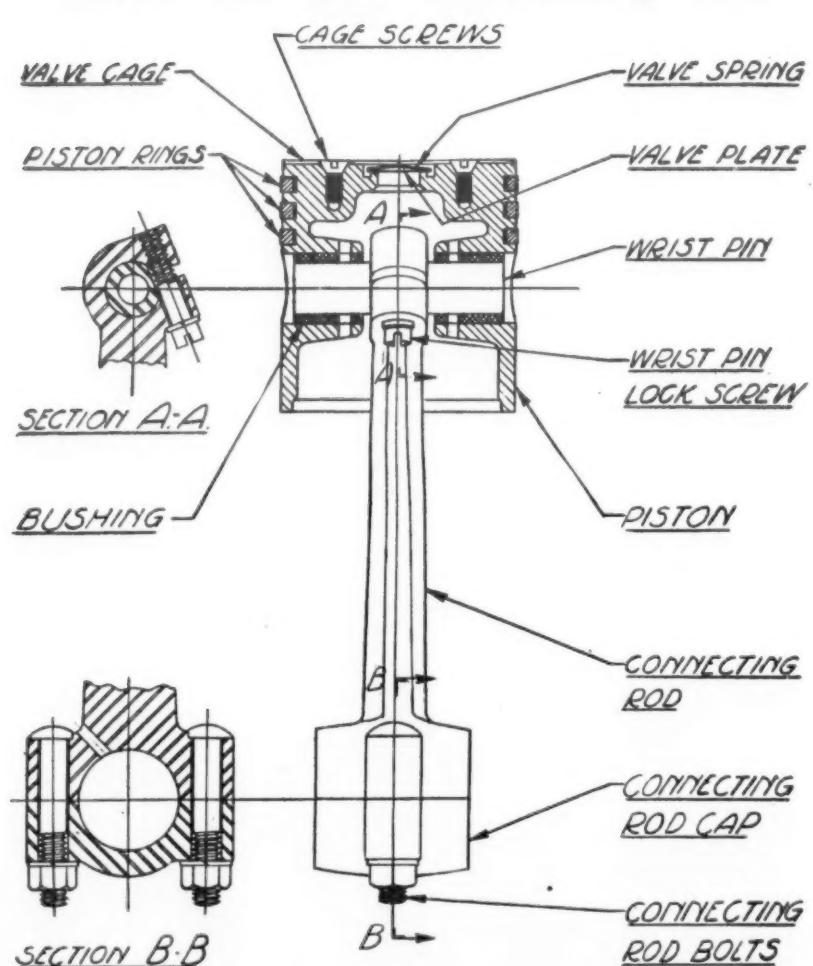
Design for holding the piston, piston pin, and connecting rod together (Universal Cooler).
